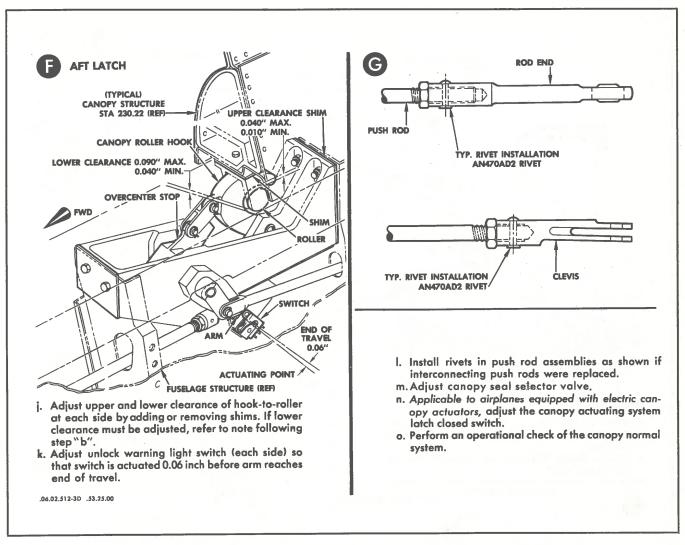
Canopy Latch Adjustment, F-106B (Sheet 3 of 3)
